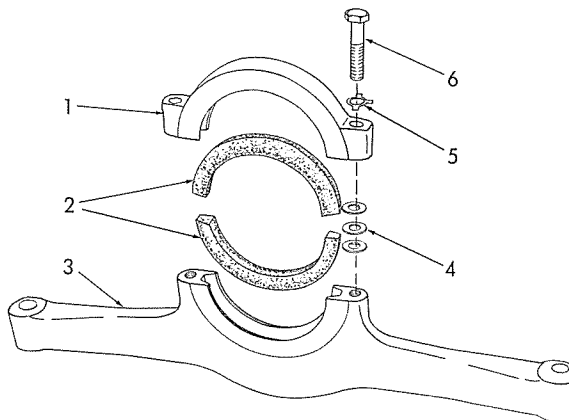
Engine Front Mounting Bracket (Used on Motor Graders) (T-71018)
